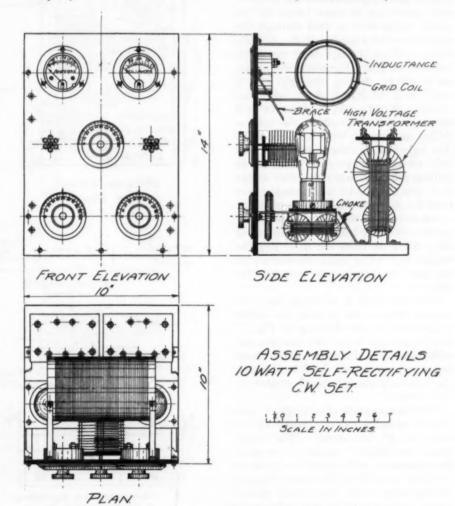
Assembly Details, 10-Watt Self-Rectifying C. W. Set
